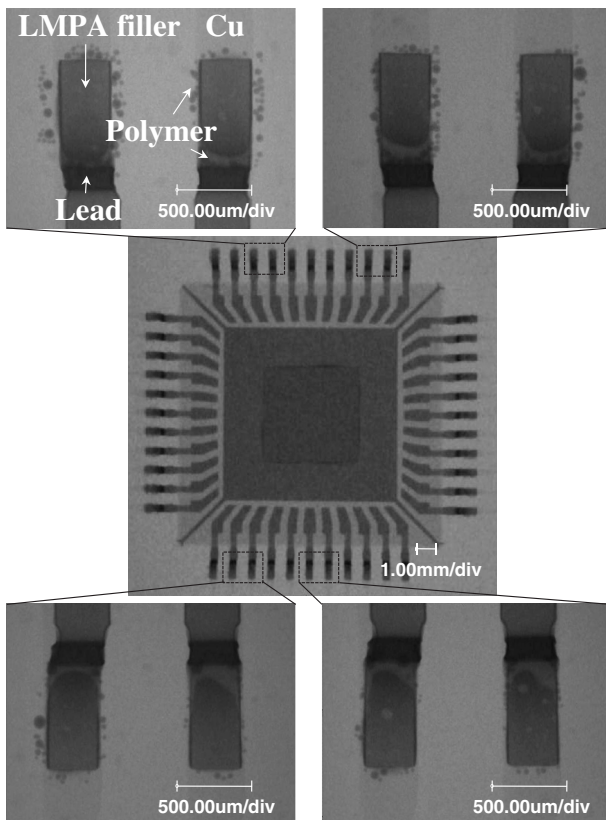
X-ray photographs of the QFP assembly with solderable ICA with reductant.
